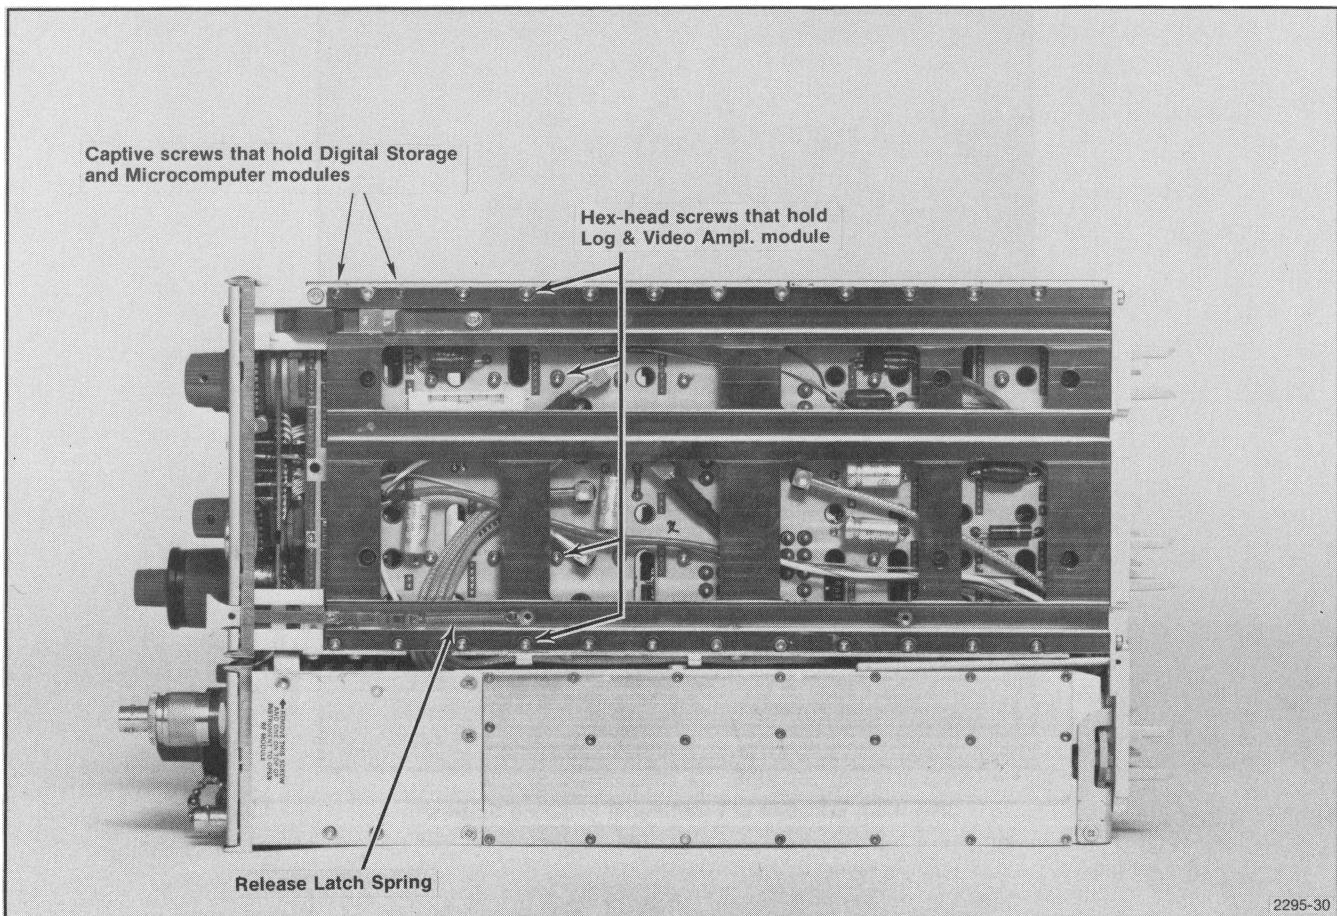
Location of the Hexagonal Head Screws That Hold the Plug-in Module Assemblies.
